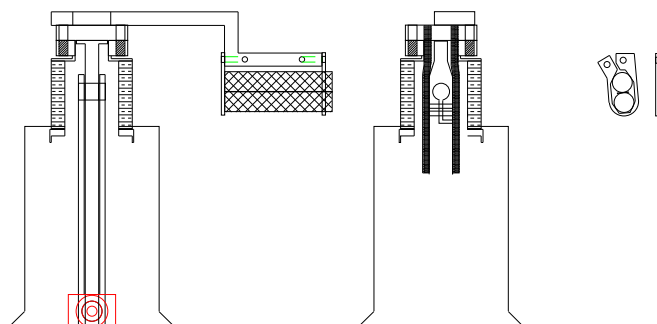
Horizontal slit assembly, showing a tube protruding into the vacuum chamber, bellows, the slit manipulator arm and the roller blade slits. To the right is shown the bracket which holds the rollers.
